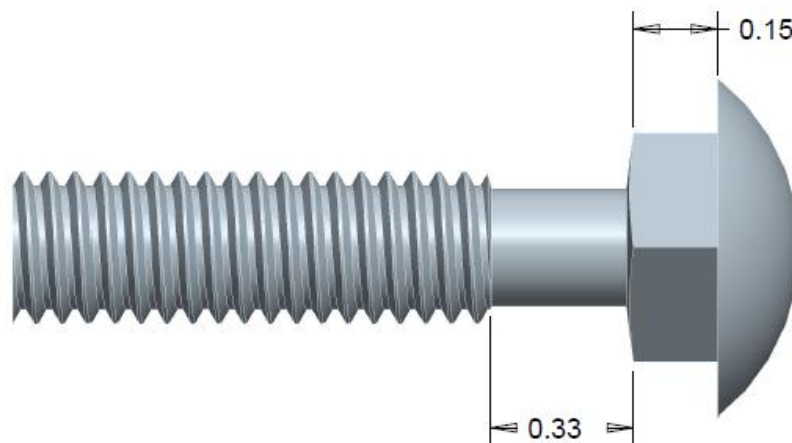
Carriage Bolt CAD Model and Modification Dimensions.
